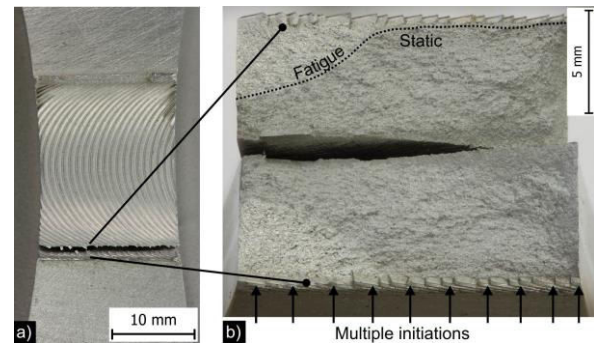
Fatigue fracture initiation on the retreating side of the weld: a) the upper part of weld; b) fracture surface with multiple initiations and higher crack growth rate in a specimen corner.
